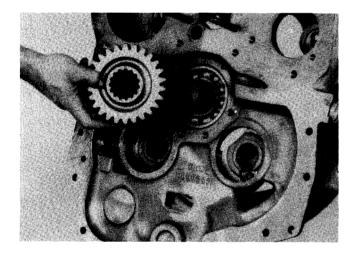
Install turbine shaft drive gear as shown in Figure 219-A.
